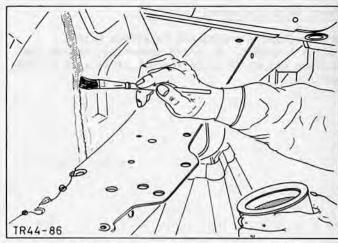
Apply zinc rich weld-through primer or anti-corrosion primer to contact faces of body and replacement part.
